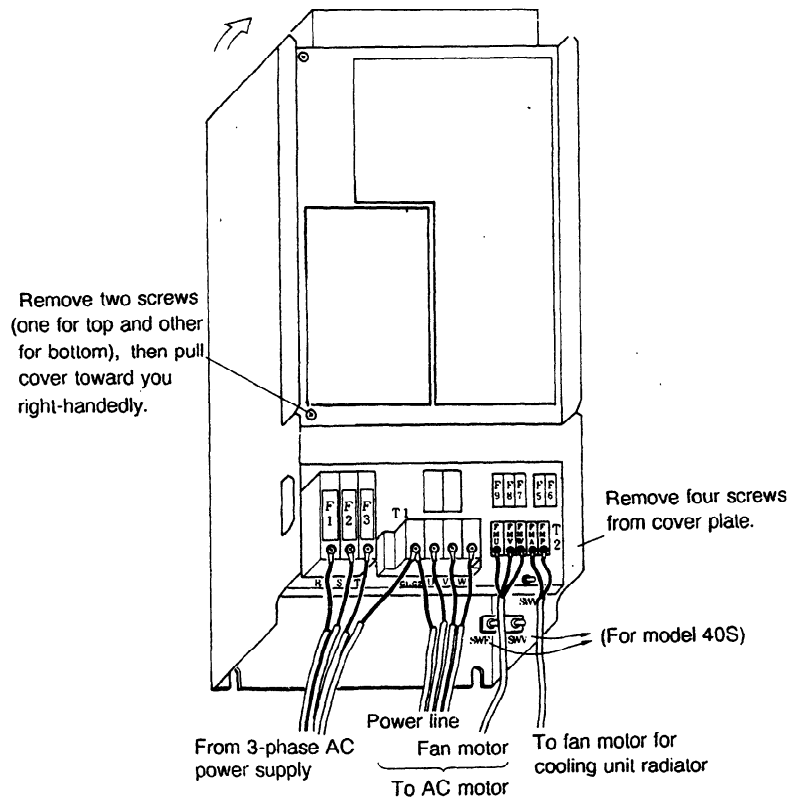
Opening Cover of AC Spindle Servo Unit
